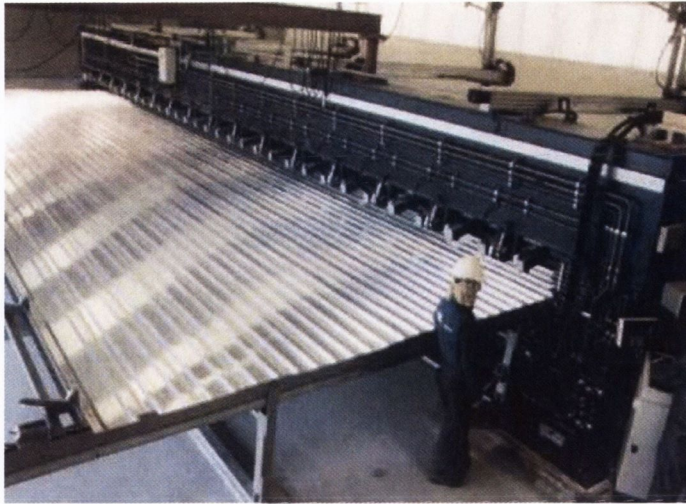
Custom built FSW machine for welding long extrusions used by Marine Aluminium [11]
